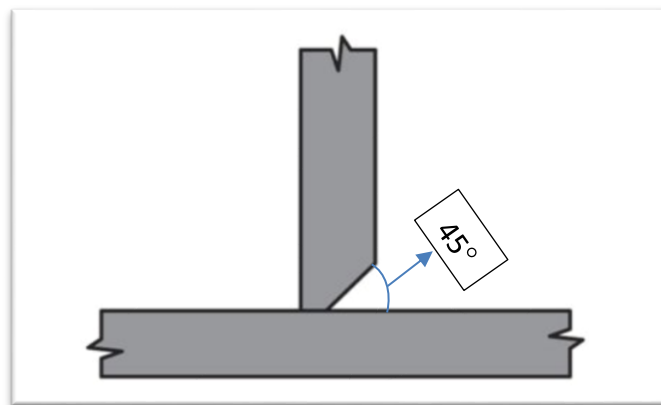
Butt weld T-joint single-bevelled. [TWI. Welding design website]
